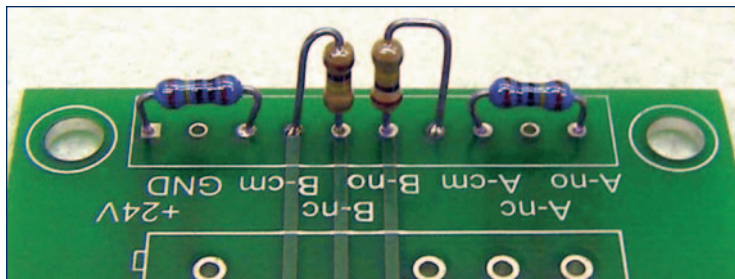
Image of ALD coated through hole components soldered to a board with the solder wetting up to the coated area. Image courtesy of Sundew Technologies, LLC.
